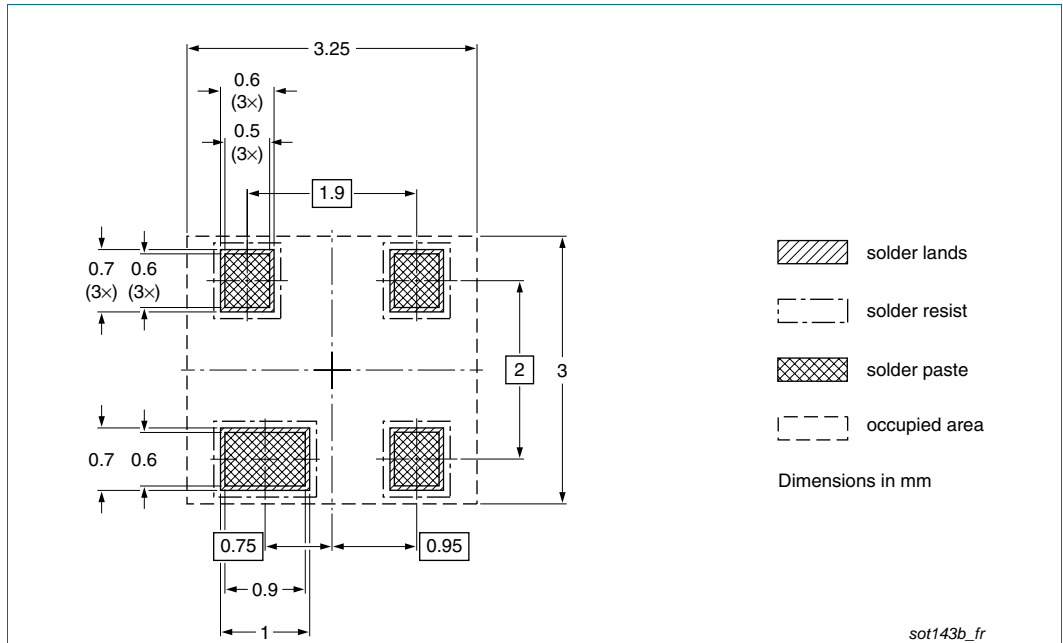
Reflow soldering footprint BAS56 (SOT143B)
